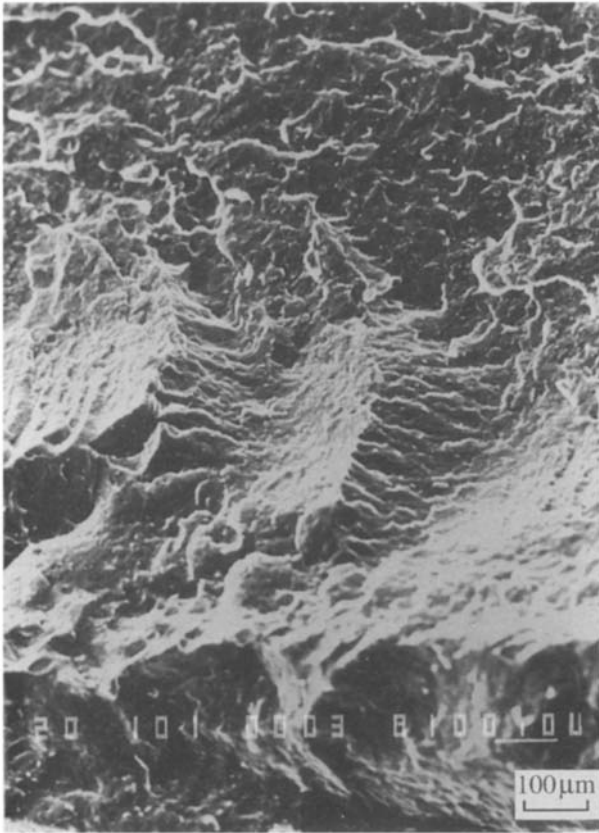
Fracture surface of fatigued Sample 1.4; crack initiation visible. Original magnification $\times 100$.
